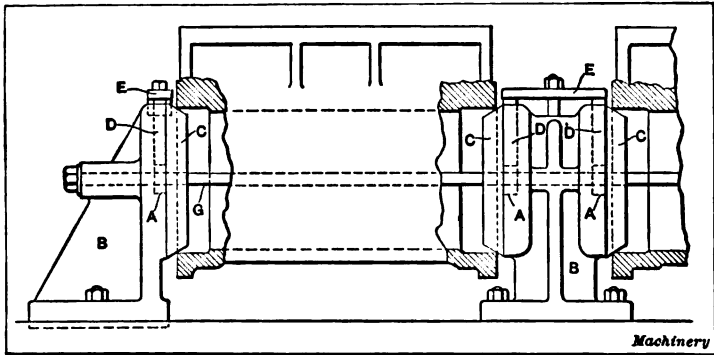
Fixtures for Holding Locomotive Cylinders while Planing
